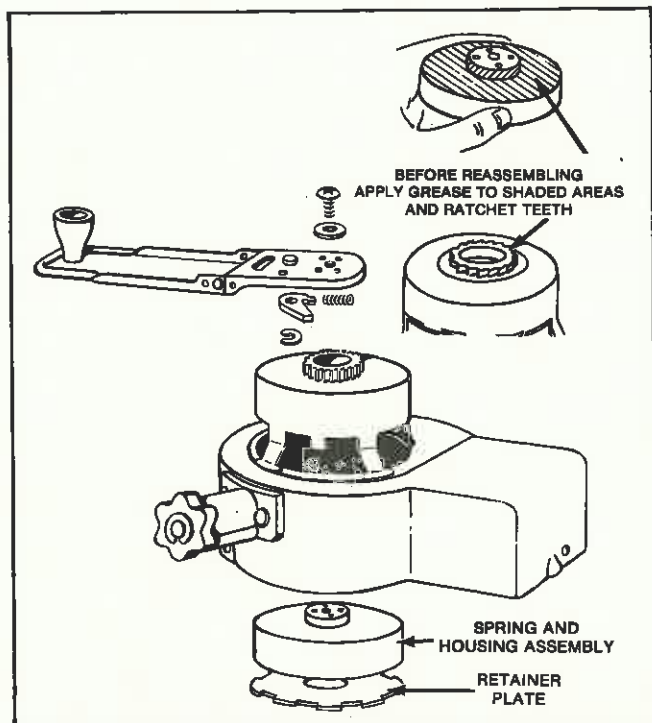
Inspecting Parts & Replacing Spring Cup
